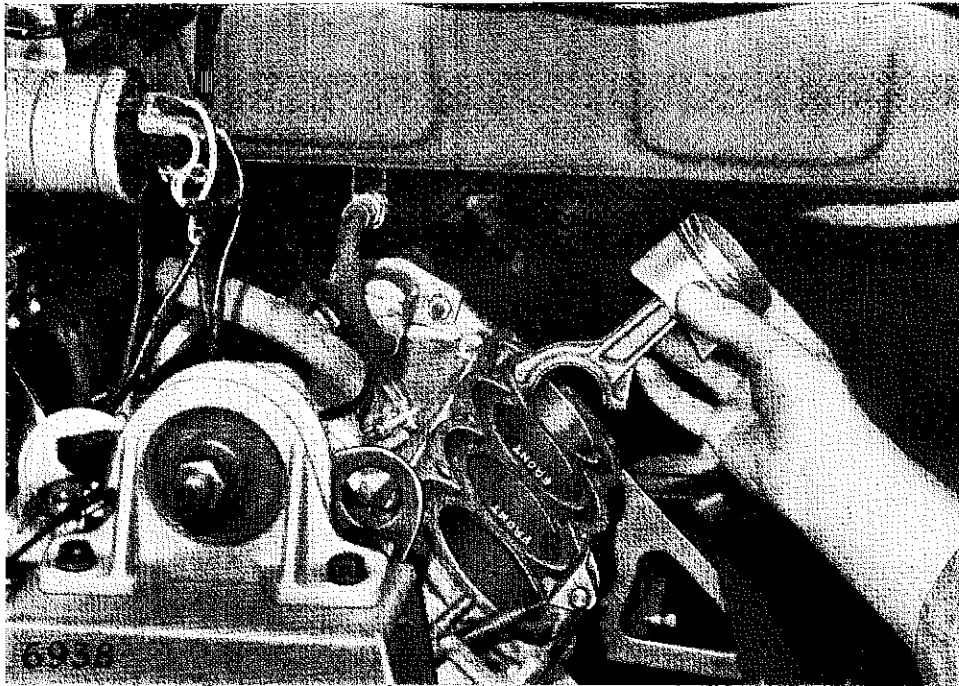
Removing No. 4 piston and connecting rod—and word FRONT stamped on piston crown
